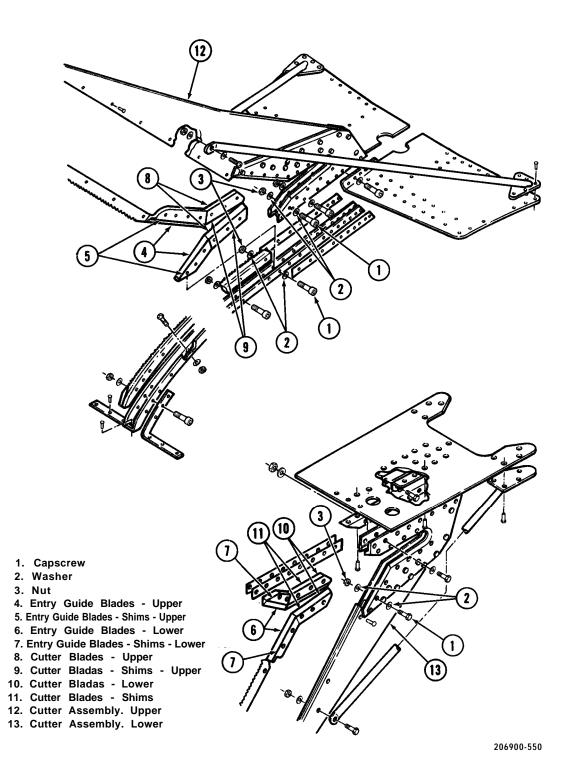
Removal — Cutter Blades (Upper and Lower)
